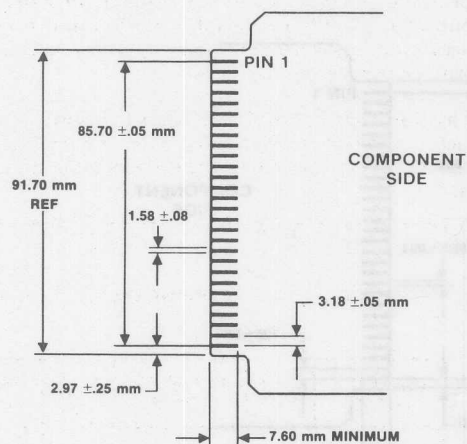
STD BUS Edge Card Finger Design - Metric.
